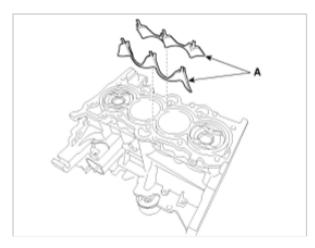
Identifying Water Jacket Insert Courtesy of HYUNDAI MOTOR AMERICA
